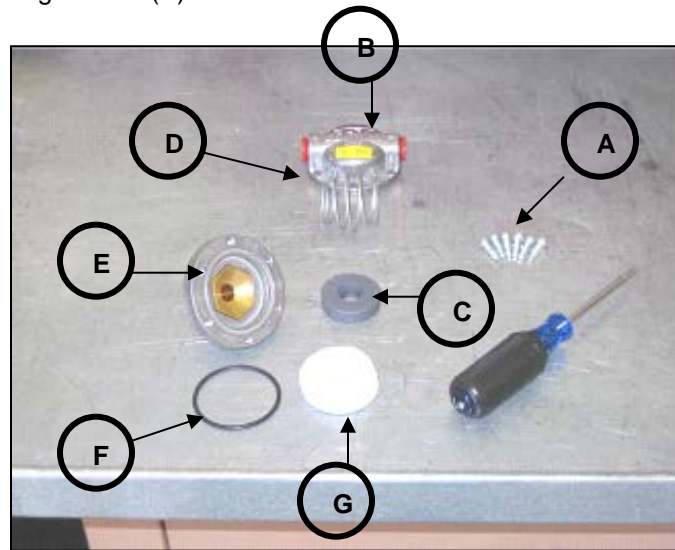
Fuel Filter Disassembly and part identification (Steps 4-7)
